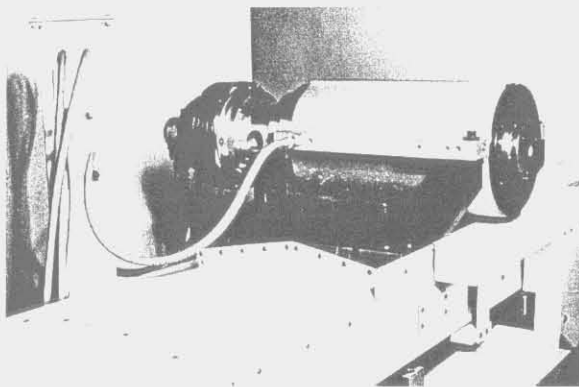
Air bearing spindle minimising the vibration and spindle error motions (From Ultra-precision Machining Centre of The Hong Kong Polytechnic University)
